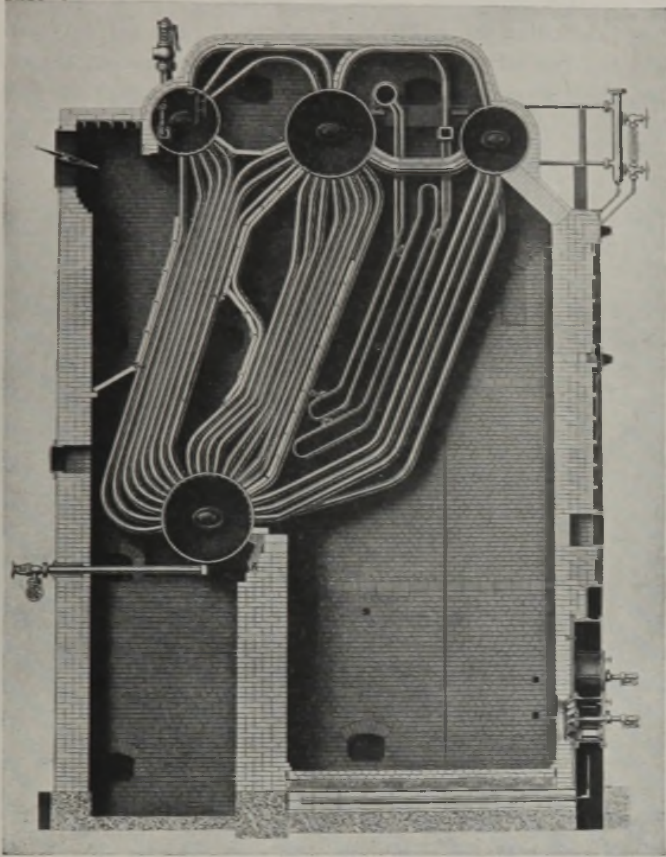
Stirling boiler with Babcock and Wilcox superheater and mechanical-atomizing oil burners.
